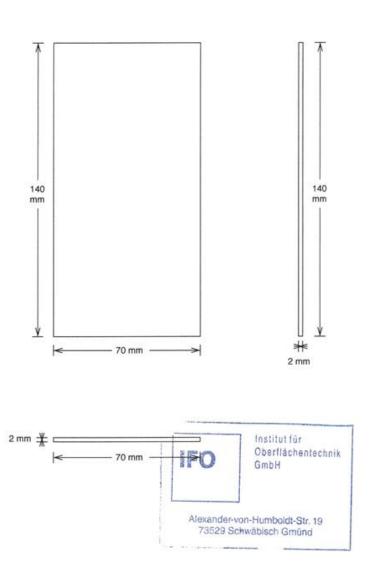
Sample Drawing (140 x 70 x 2.0 mm panels)
